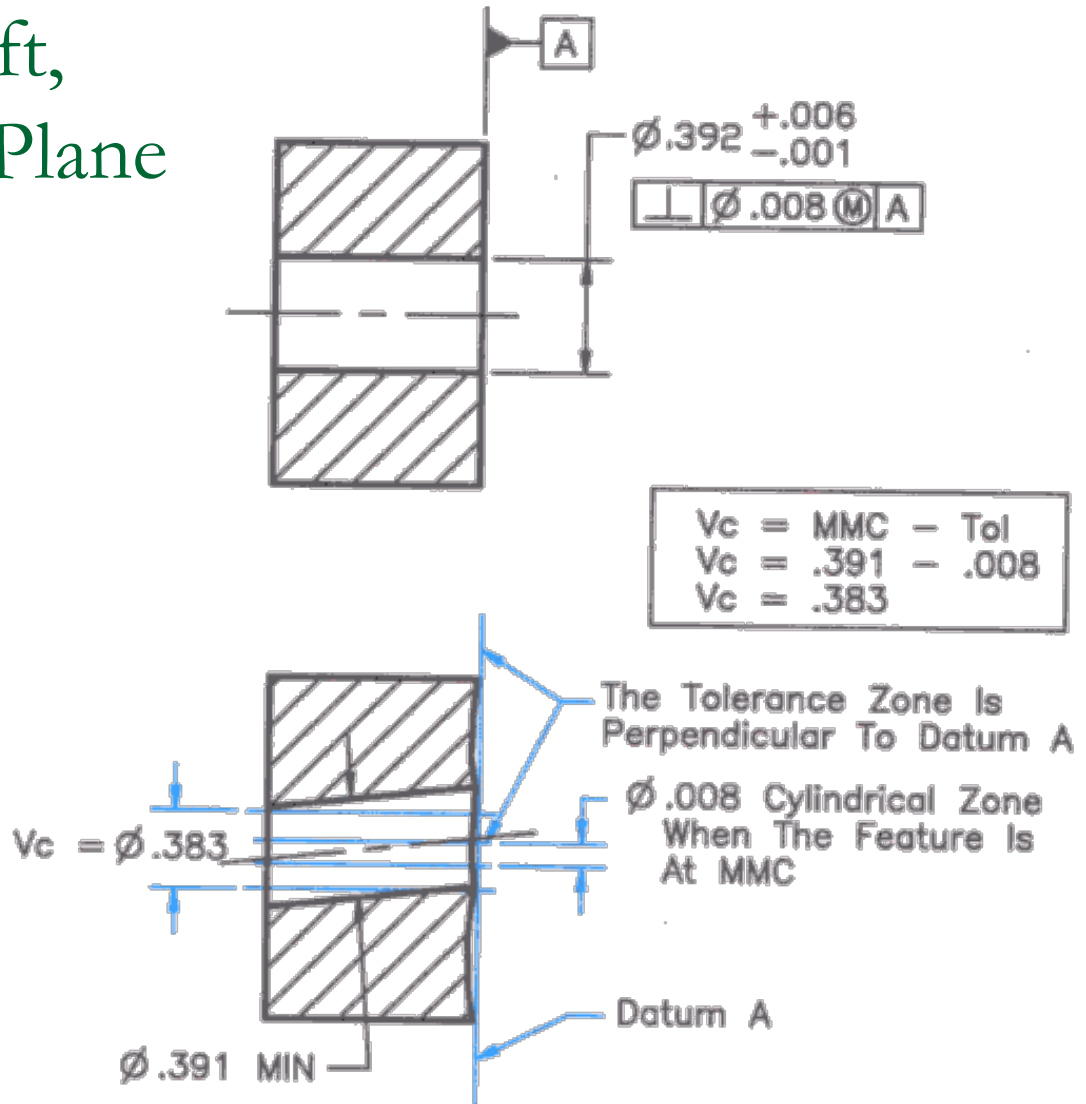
The virtual condition for an internal feature of size is smaller than the MMC of the feature.
